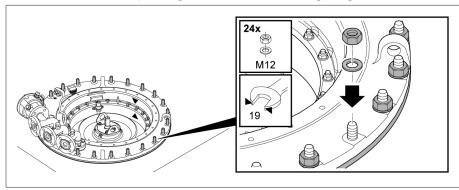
Screwing the on-load tap-changer head to the mounting flange
